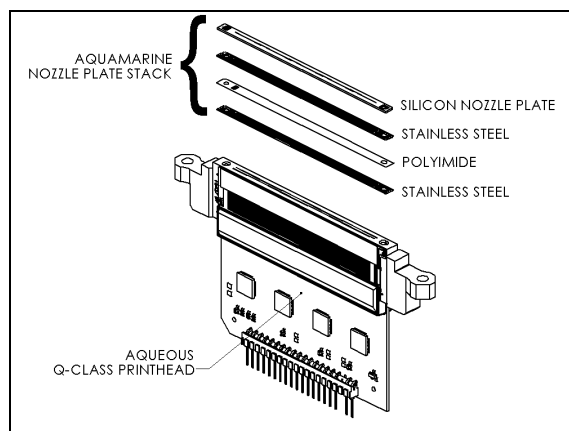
Aquamarine Printhead with Stainless Steel components shown.
